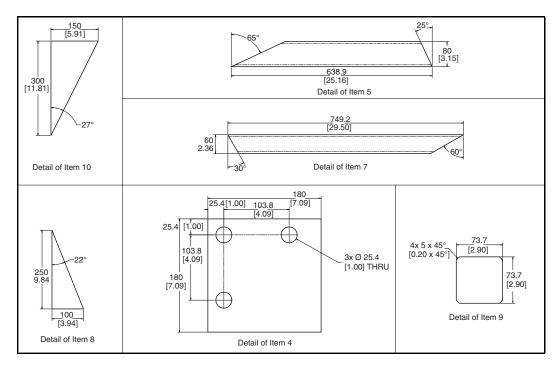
Mounting Frame, Details Items 4-5, 7-10
